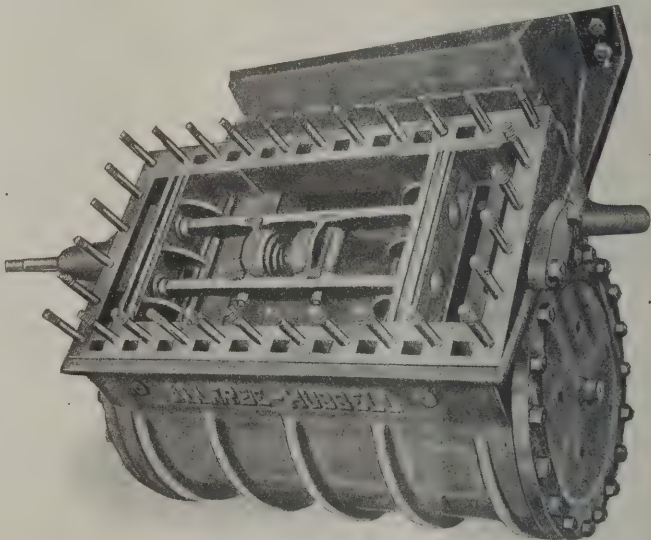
Side View of Typical Allfree-Hubbell Cylinder with Steam-chest Cover Removed.
